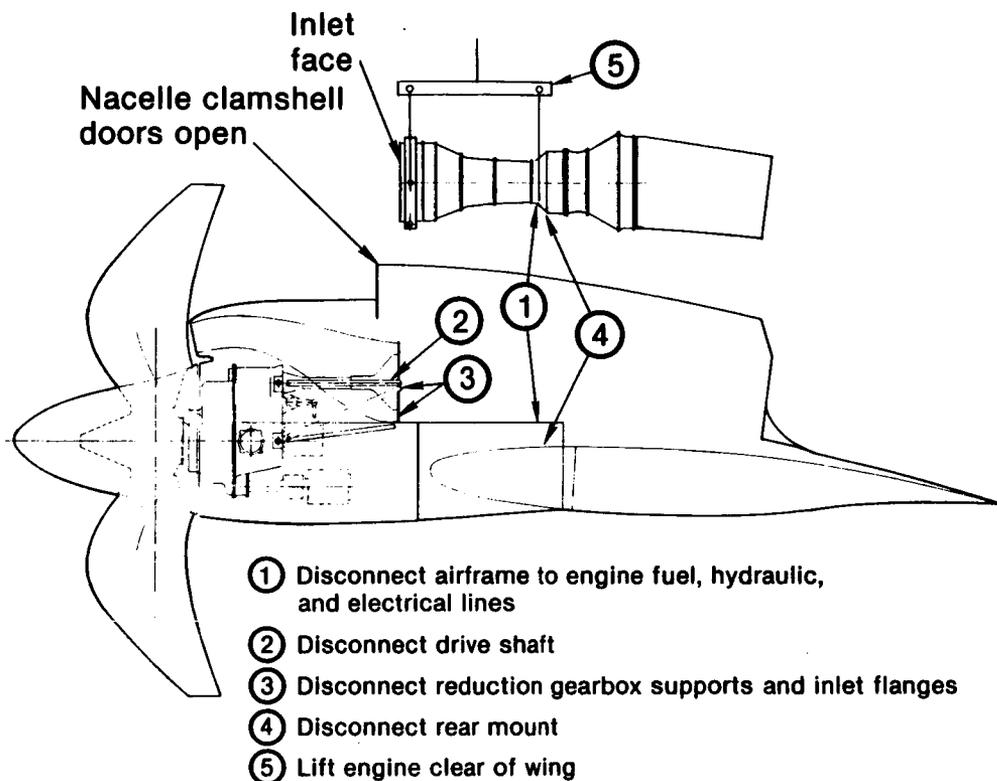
Turboshaft Engine Removal - The average time for removal and replacement is 120 minutes. (J27638-29)
